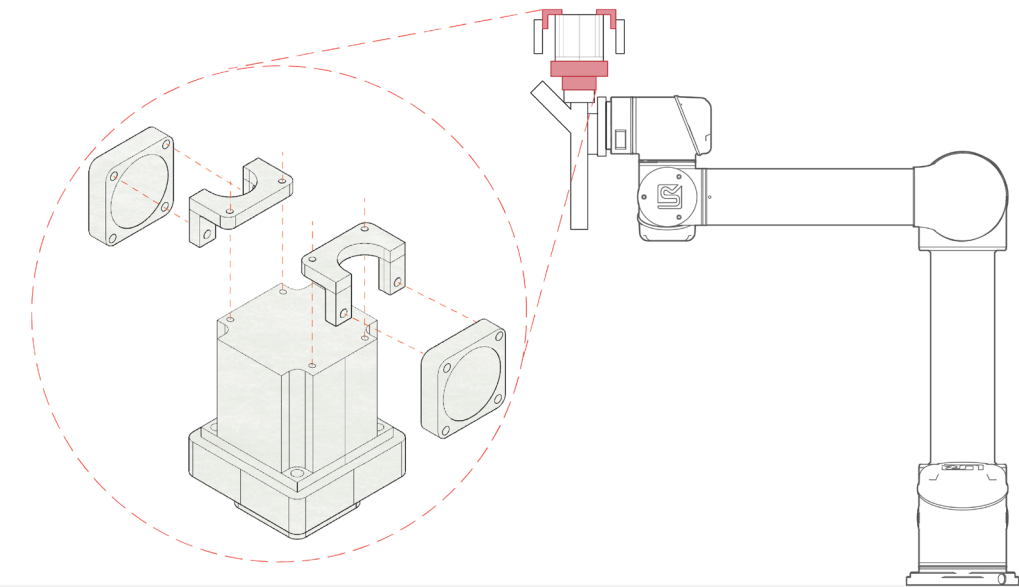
Connector parts connect stepper motor, cooling fans and steel funnel together with bolts. Source: Author.
